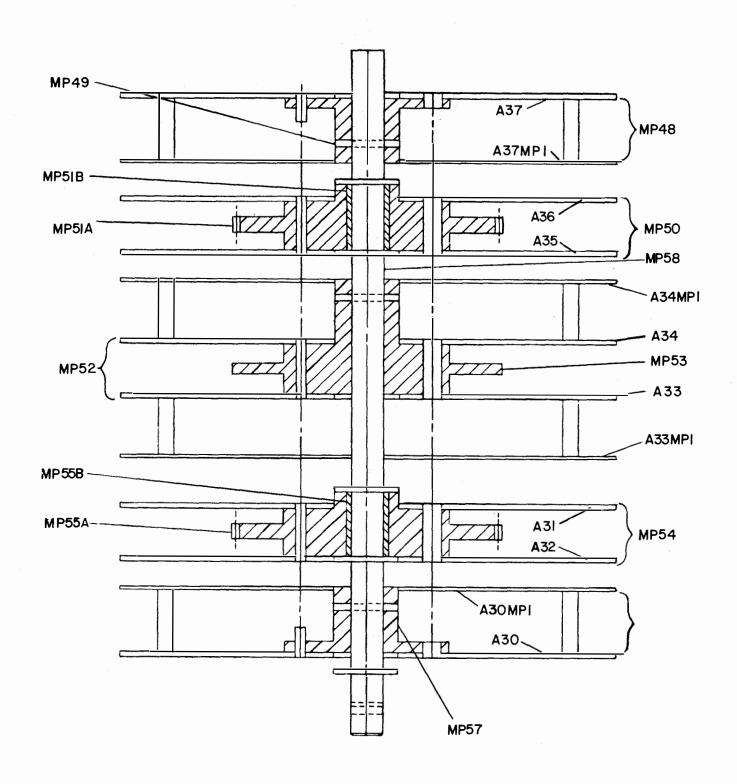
Tuning Rotor Assembly A2A4MP47, Component Locations
